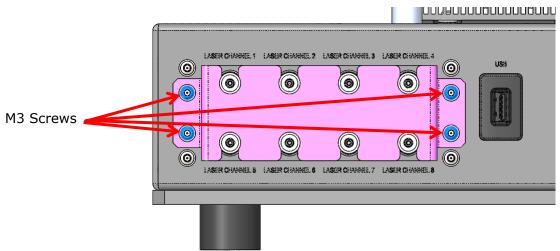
Fiber Locking Panel Fastener Locations (highlighted in blue)
